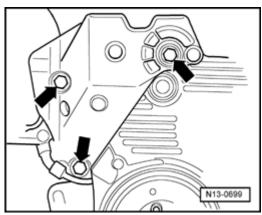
Identifying Engine Mounting Bolts Courtesy of VOLKSWAGEN UNITED STATES, INC.
